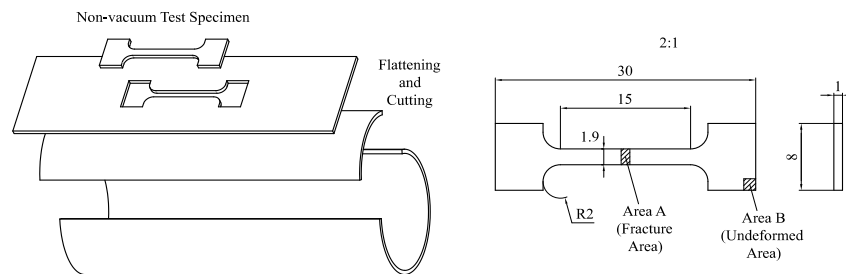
The schematic representation of specimen machining and dimensions of the specimen
